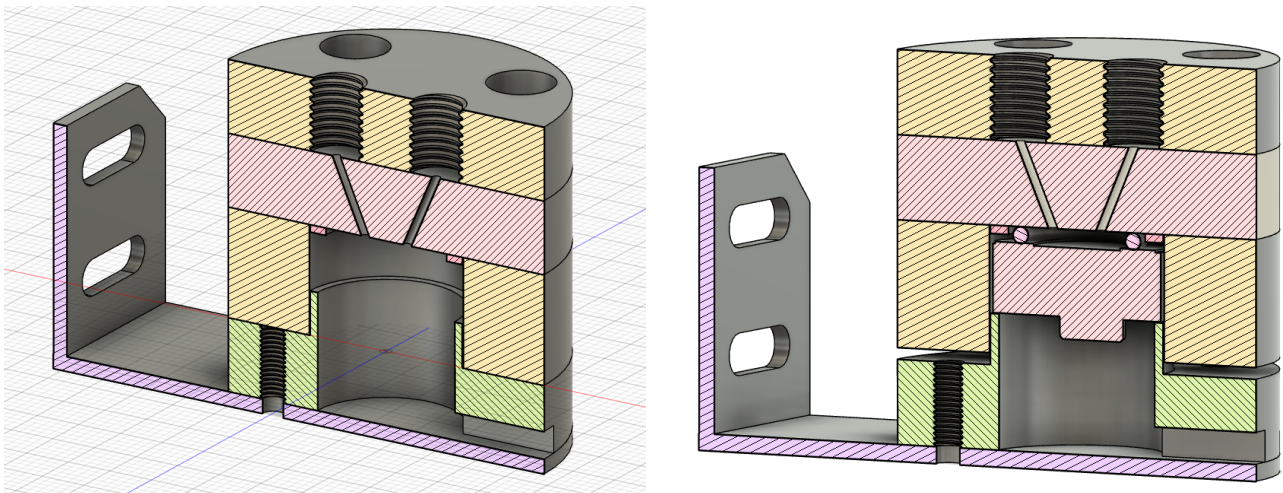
Left side: Section view of 3D design. 1/4-28 UNF sockets, angled fluid channels in the PTFE disc and the cavity for sensor visible. In the bottom part a channel for the output cable is present. Right side: the pressure sensor and O-ring are shown. The clearance between the bottom component, which pushes the pressure sensor upward, and the middle holder allows for bolt tightening, which compresses the O-ring to create a proper seal.
